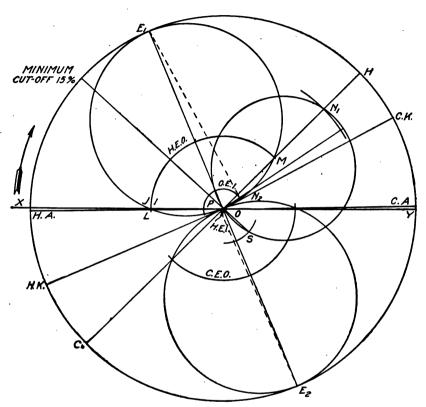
Zeuner Diagram Showing Additional Factors in Design of Meyer Valve
